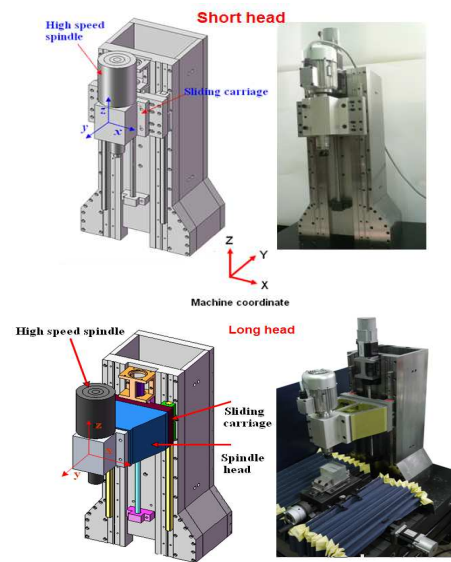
Schematic of the vertical milling machine, including column frame, feeding mechanism and spindle head associated with the spindle unit. The spindle head can be constructed into short stock or long stock
